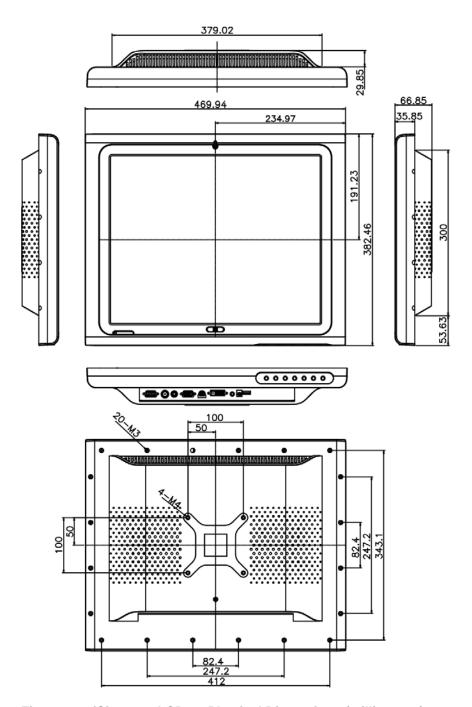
iSignager LCD-19 Physical Dimensions (millimeters)
